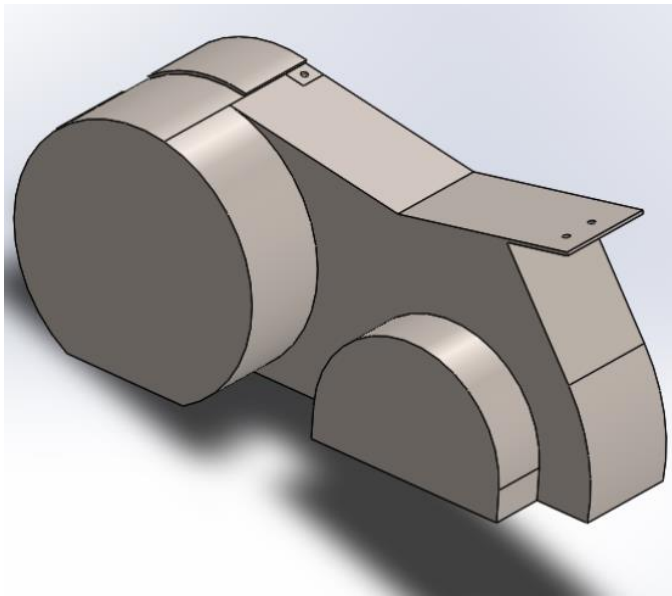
SolidWorks model of the clutch cover and the two main mounting locations, one of which mounts to the Rush stock location and the other mounting to one of the chassis bars.
